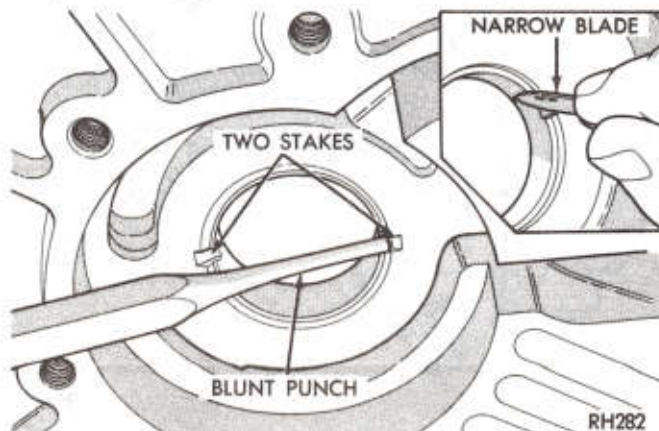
Stake Pump Bushing (A-904T and A-999)
